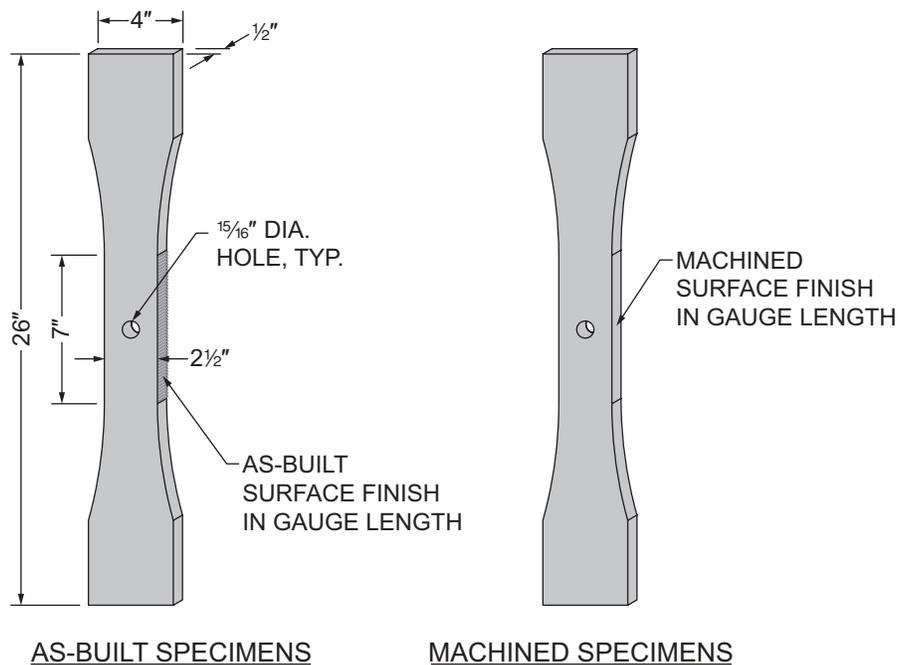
Specimens with as-built and machined surfaces for fatigue performance tests.
